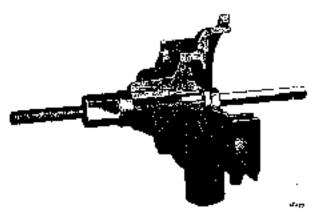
Installing Water Pump Shoft Bushings with Tool C-373 (1936-42 Models)
